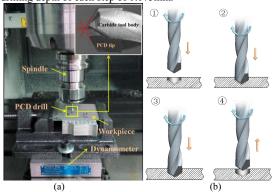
Peck drilling experiment. (a) experiment setup; (b) 4 parts of one step.
